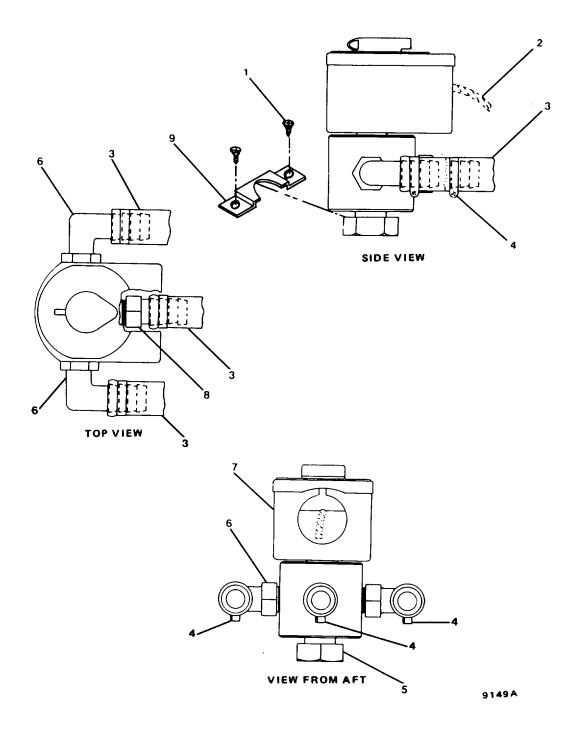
Solenoid Valve Assembly Repair (Sheet 2 of 2).
